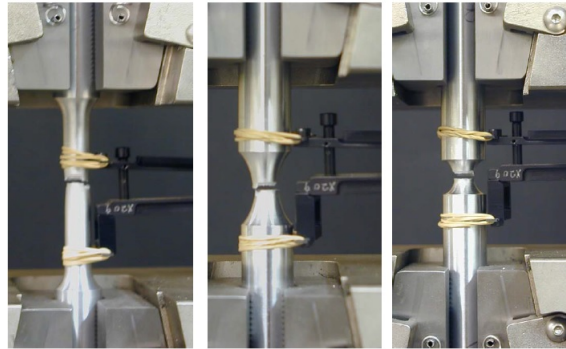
Fracture tensile specimens with different geometries ($\eta = 0.33$ to 1) [68]
